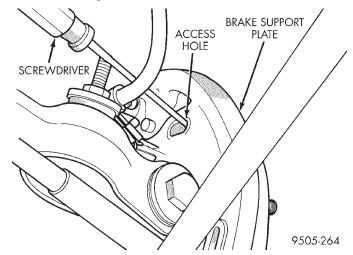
Backing Off Rear Brake Shoe Adjustment
